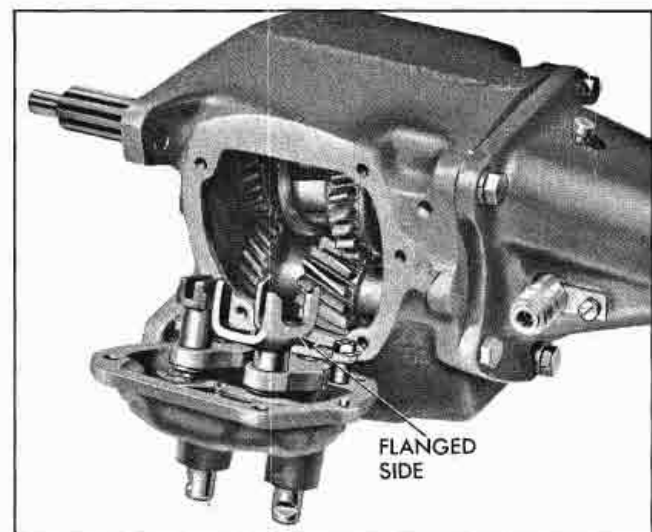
Positioning First and Reverse Shifter Fork in Transmission Side Cover
